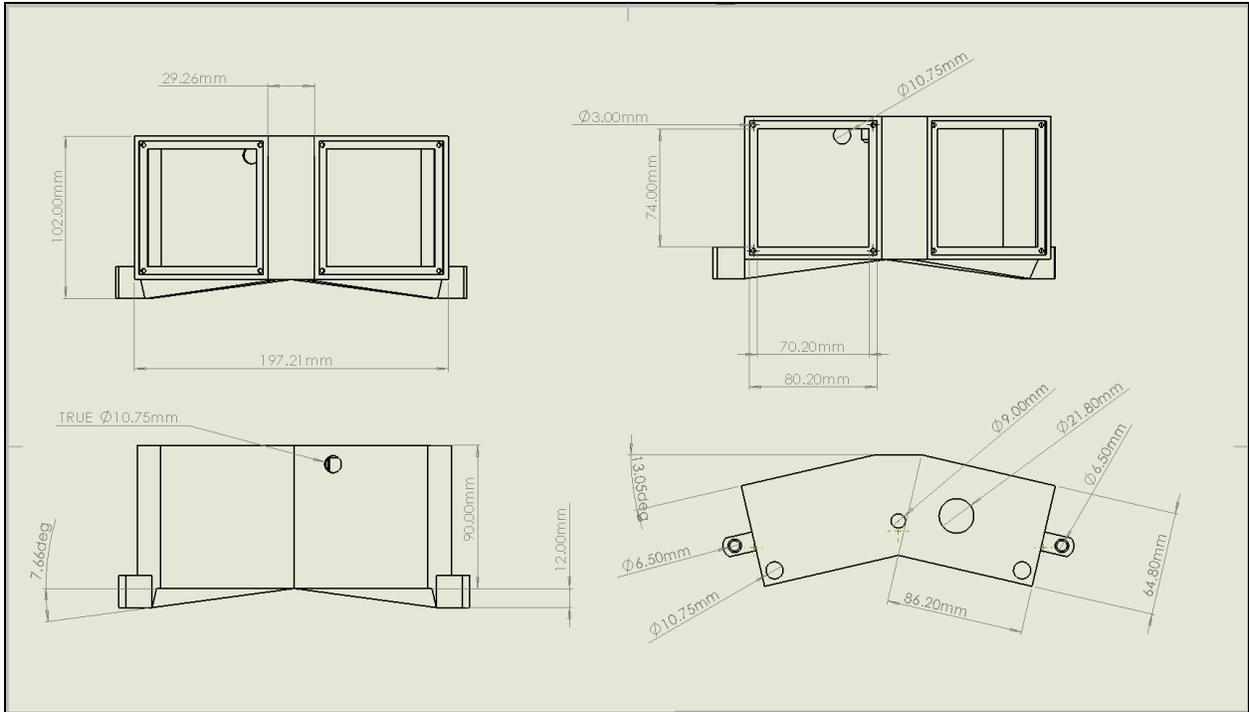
Power and Sensor Circuitry housing CAD and dimensions (mm).
